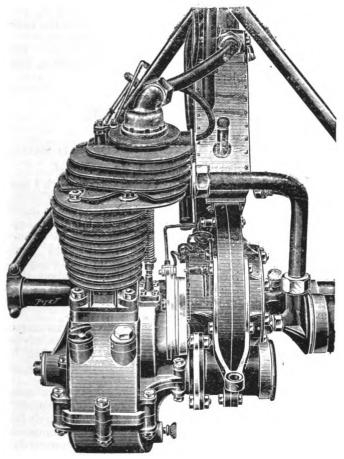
THE GAILLARDET PETROLEUM MOTOR.
